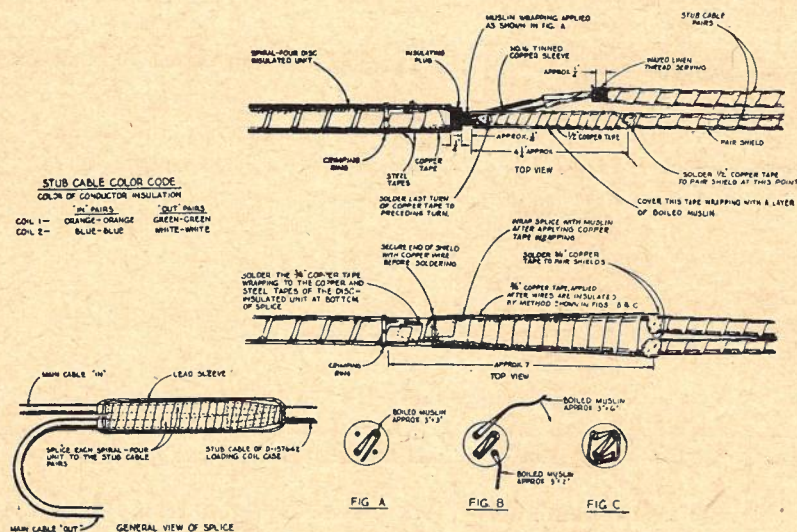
Method of jointing intermediate loading pot into disc-insulated cable.
